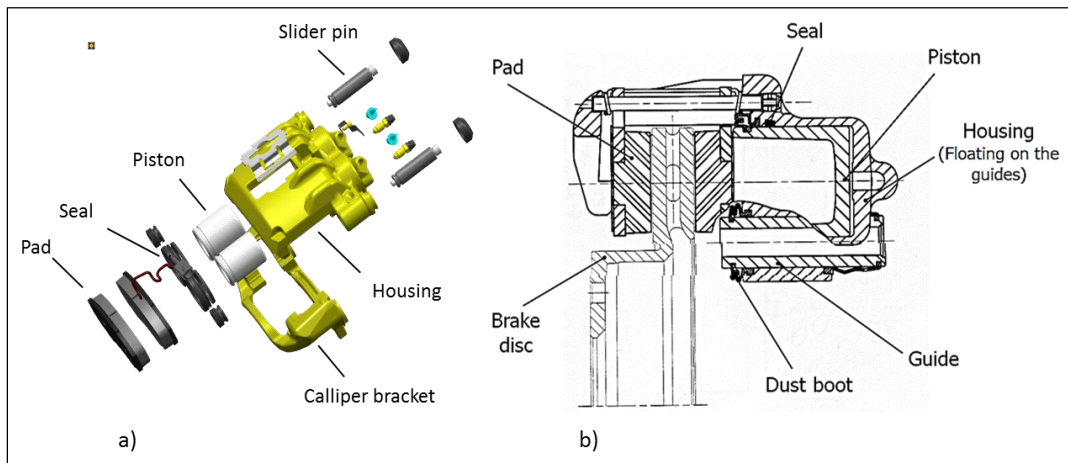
a) Exploded and b) section view of a floating hydraulic caliper. (Courtesy of Brembo S.p.A.)
